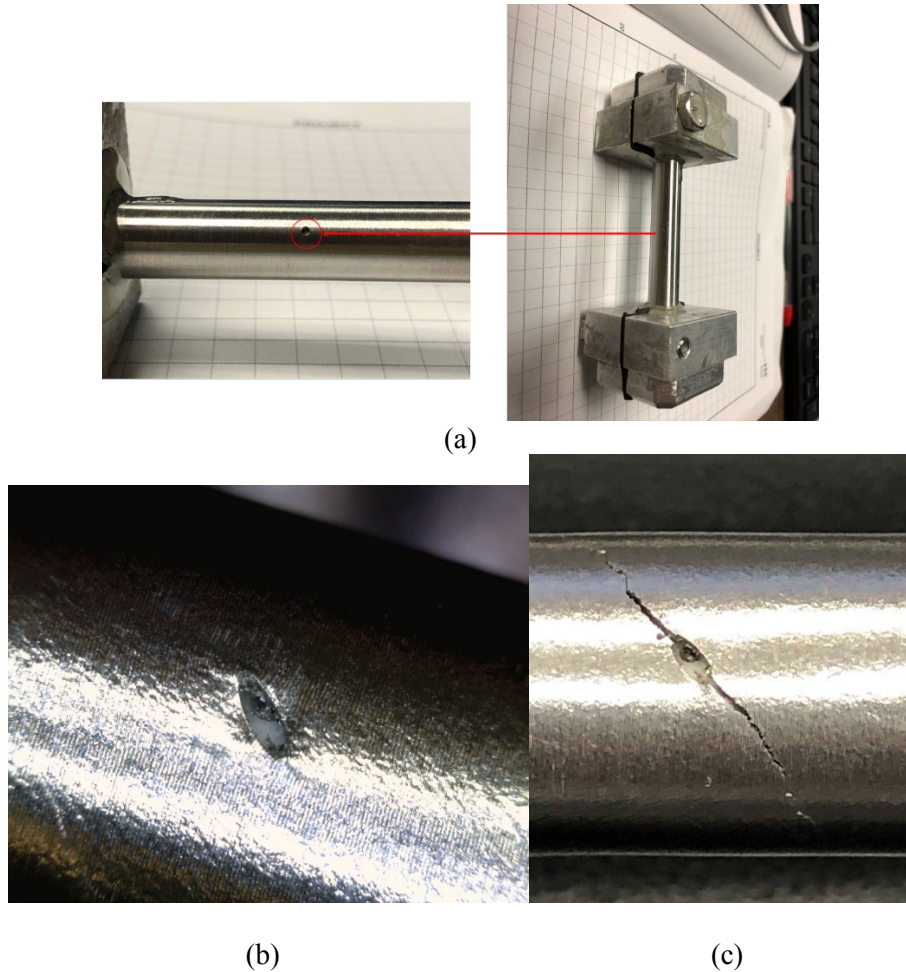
The fatigue crack growth profile of Zr-4 clad SNTT sample under 100 lb-in torque cyclic loading
